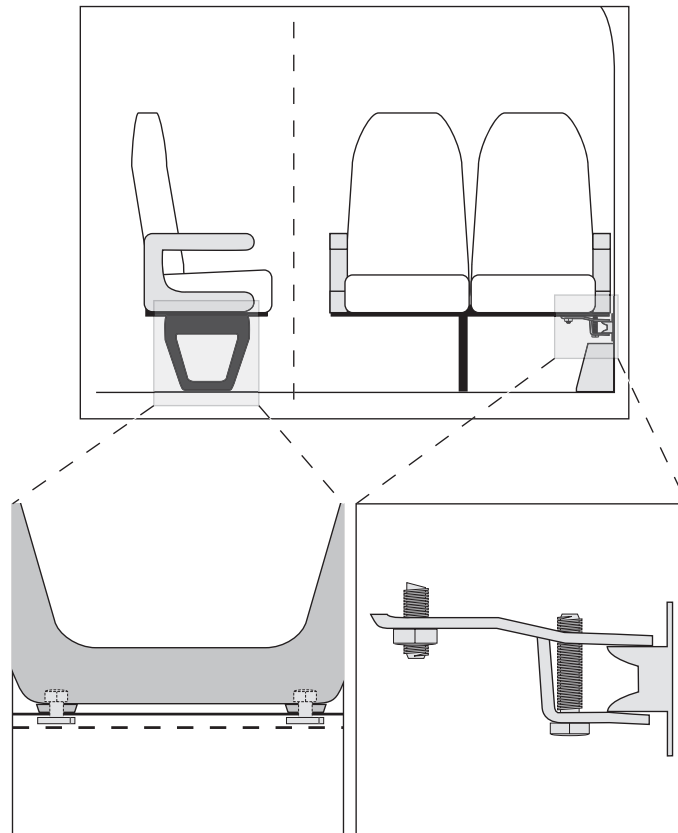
Representative diagram of motorcoach passenger seat. On the LEFT: side view with close-up of pedestal, showing T-bolts and floor track attachment. On the RIGHT: front view with close-up of forward C-clamp and sidewall track.
